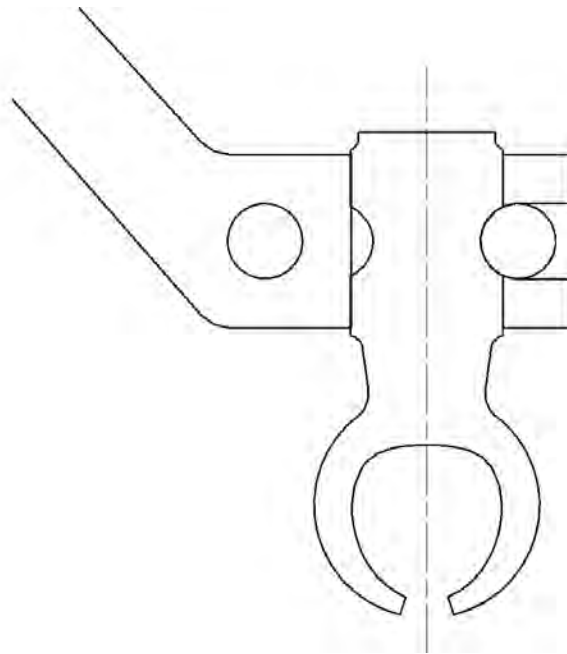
Section cut - hollow ball pin outer ball joint
